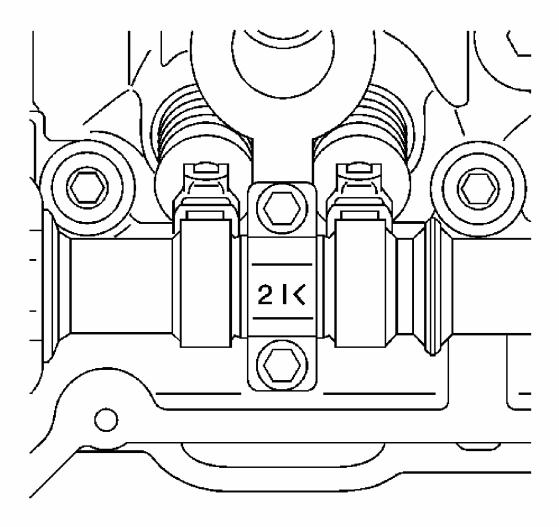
View Of Intake Camshaft Bearing Cap Markings Courtesy of GENERAL MOTORS CORP.
